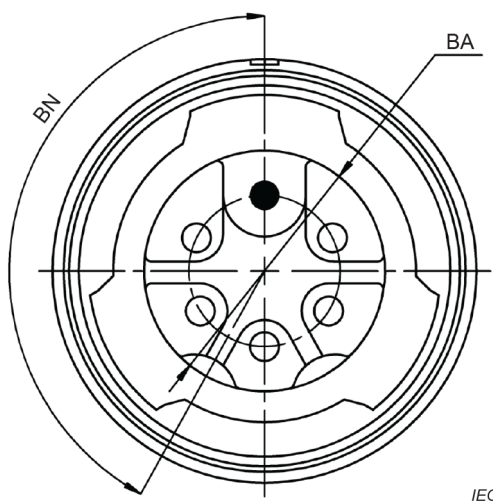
Front view of the female side of the push-pull housing for M-coding
